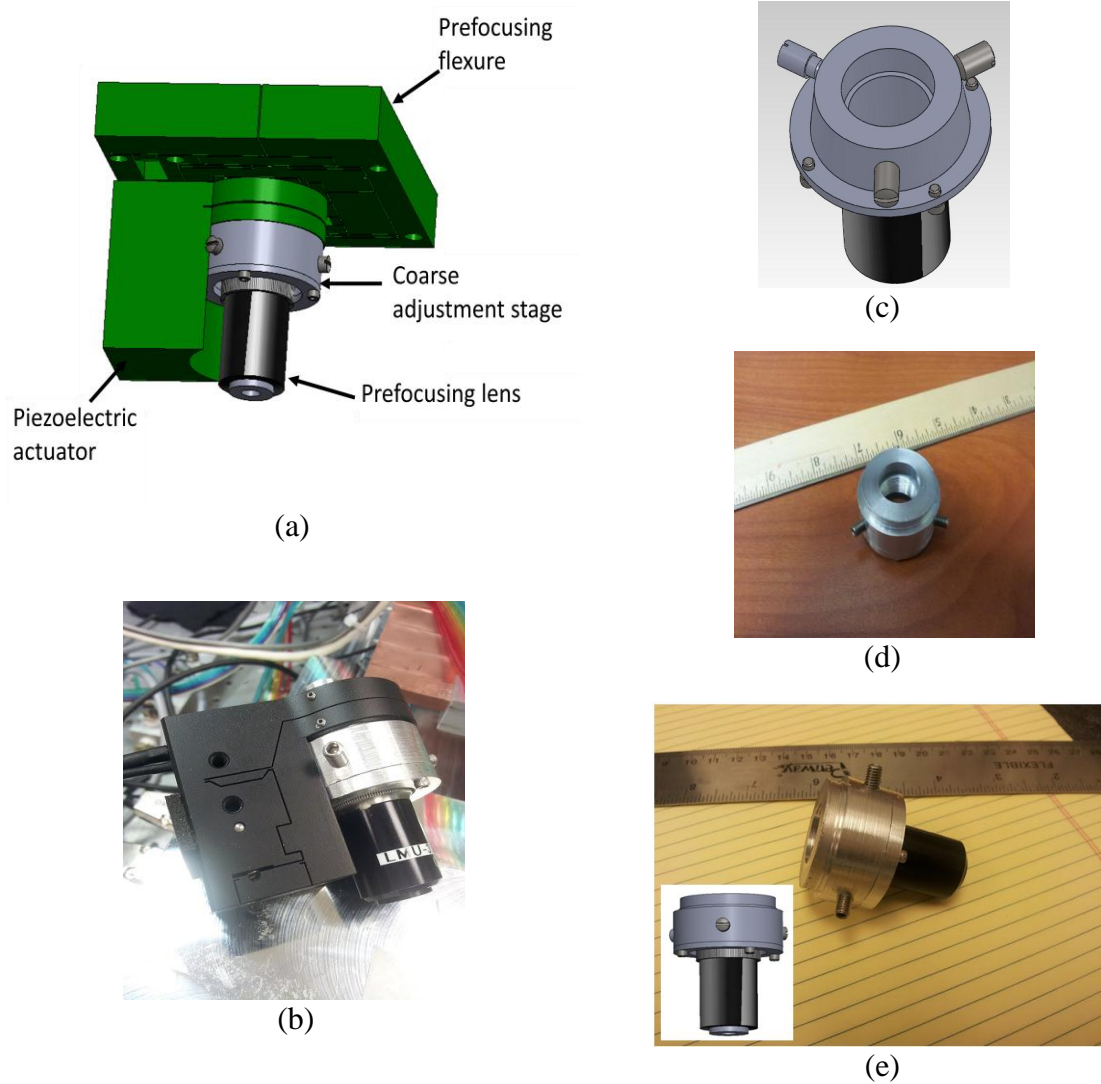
Coarse adjustment prefocusing stage: (a) location of the stage, (b) stage assembly with the Z-direction piezoelectric actuator, (c) CAD model showing the details inside the stage, (d) assembled stage, (e) stage assembly with the prefocusing lens.
